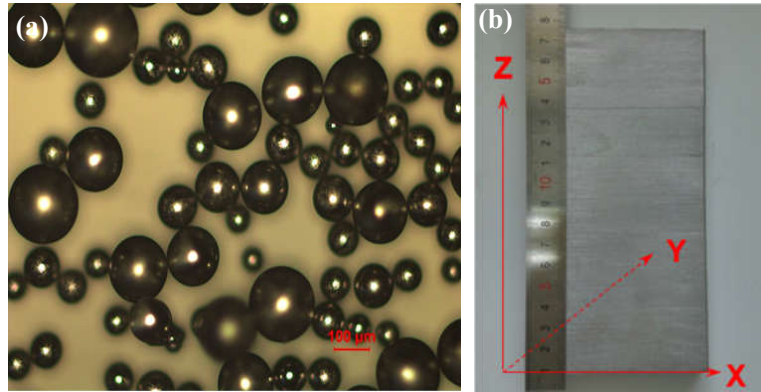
CLAM steel powders (a) and block prototype fabricated by SLM (b).
